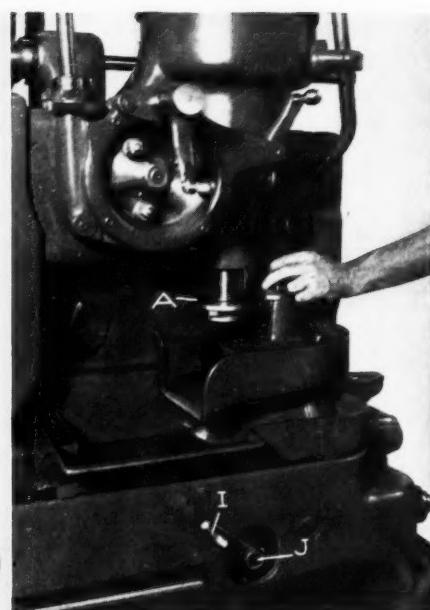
Another Step in Aligning the Cutter-spindle and the Work-holder
